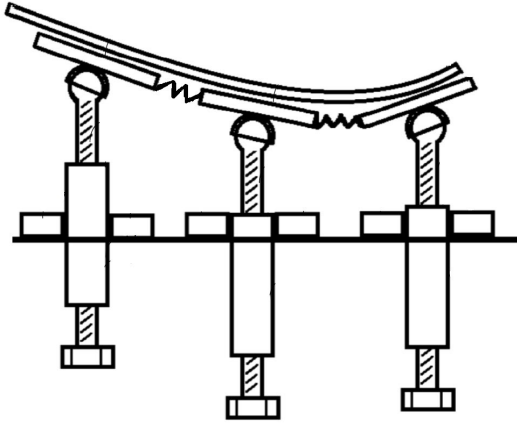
Adjustable mold showing the tiles joined with springs forming a segmented version of the desired shape, and the workpiece being formed on top of it
